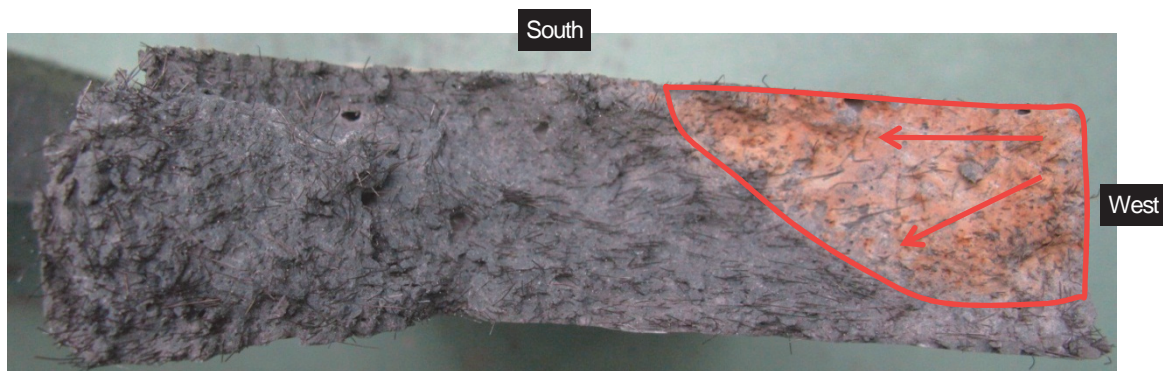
Fatigue fracture surface of Preliminary test 1 specimen (lower half of the fractured specimen)
